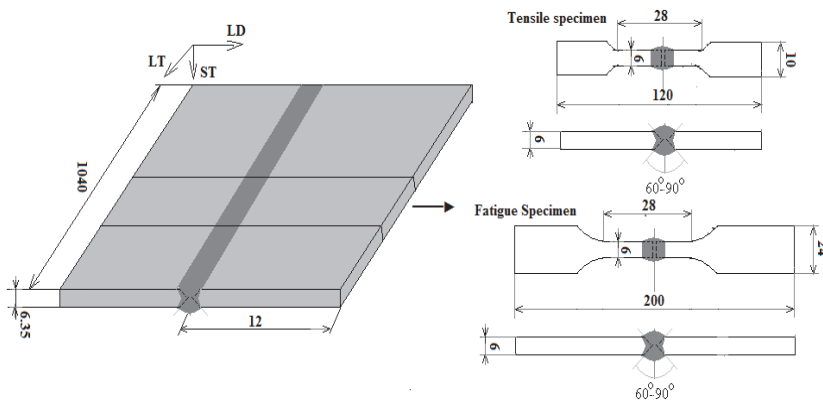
Dimensions of the tensile and fatigue specimens machined from the welded plates.
